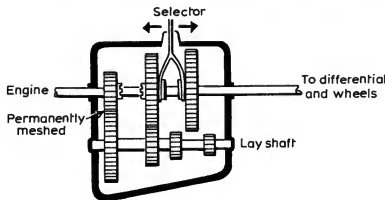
How a typical manual gearbox works; one layshaft transfers the drive from engine to wheels
